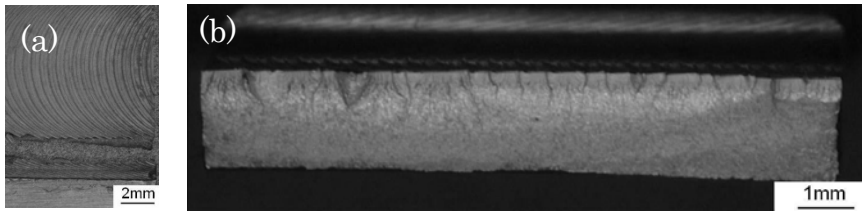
Typical fracture surface in case multiple cracks form at tool mark
